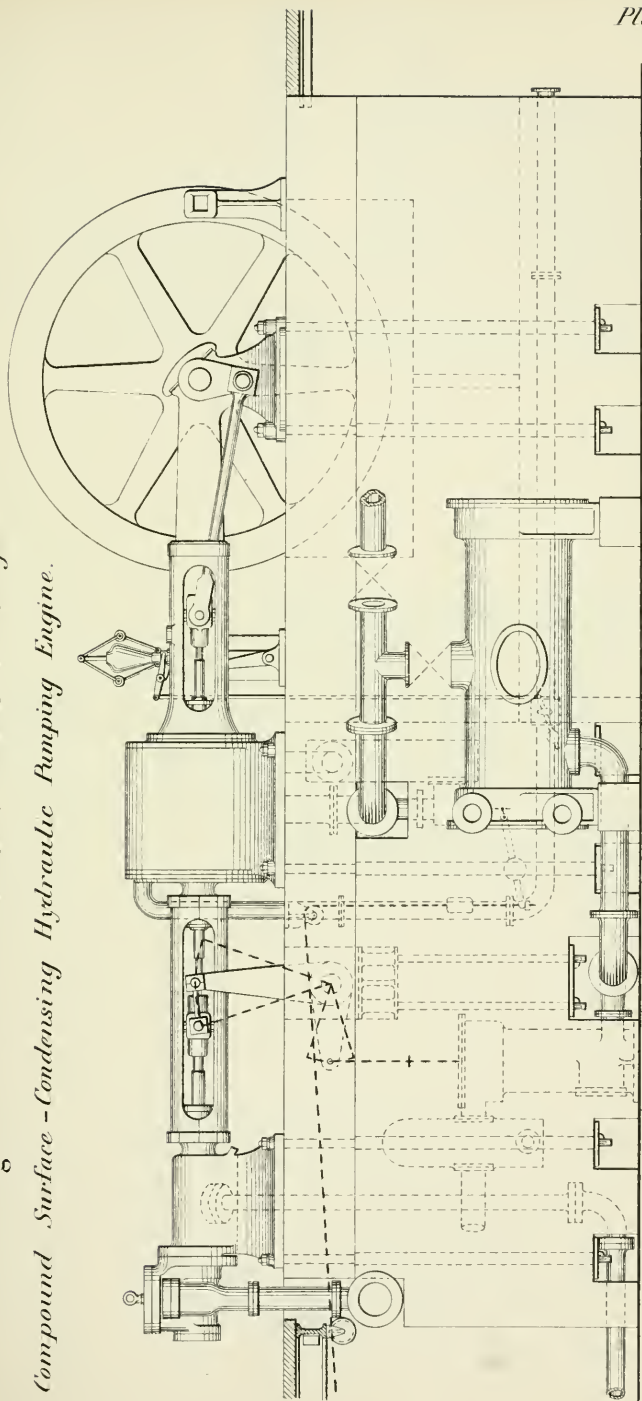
Plan.*Fig. 41. *Longitudinal Section.
